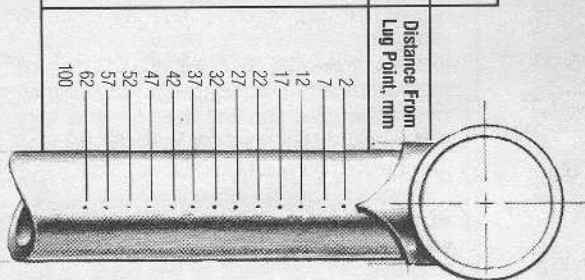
Top view of the top tube/head tube joint showing one set of hardness indentations.
